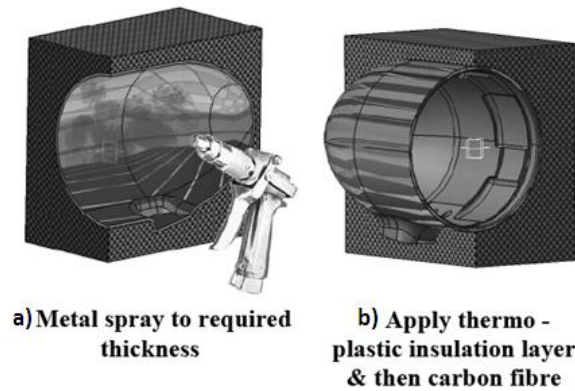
Metallic Composite Manufacturing Process with a) Spray of Metal in Mould and b) Composite Mounting [18]
